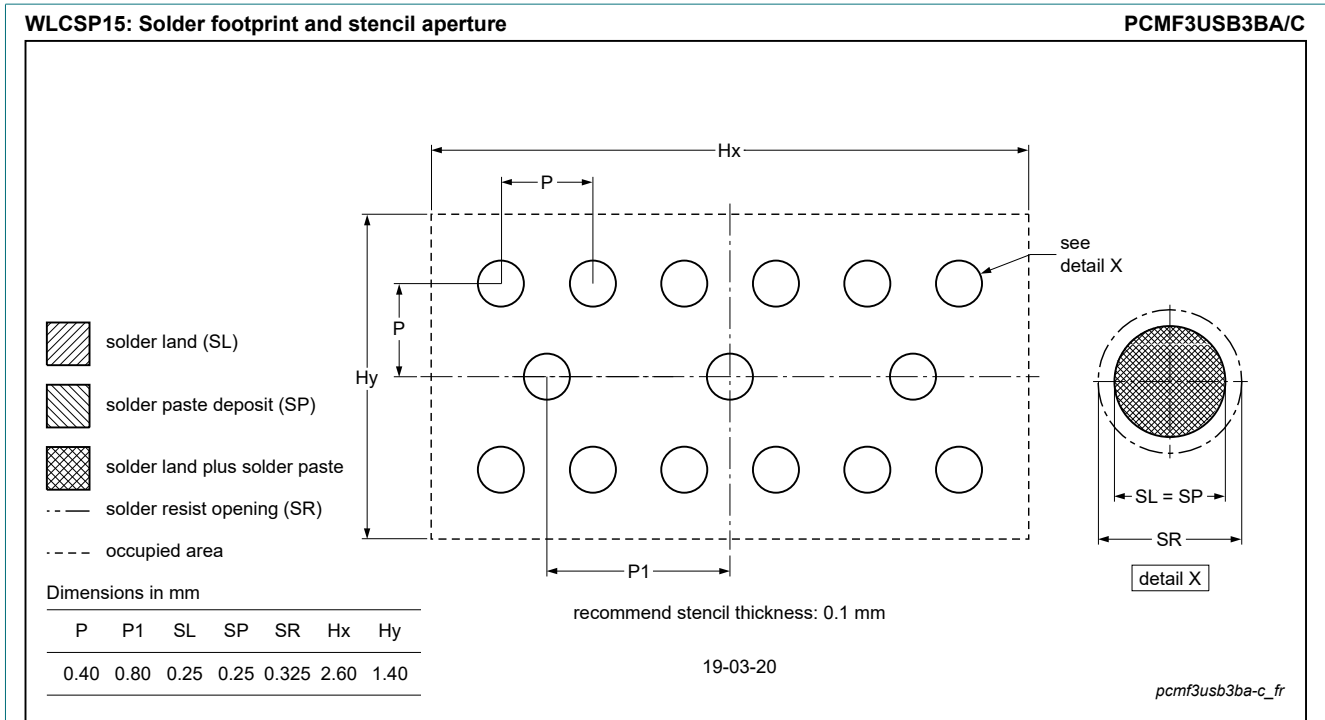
Soldering footprint WLCSP15 (PCMF3USB3BA/C)
